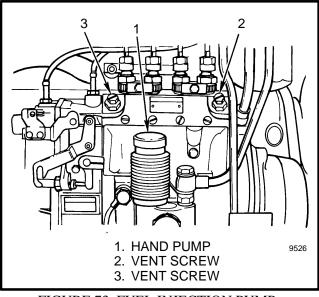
FUEL INJECTION PUMP, MODEL PE4A
